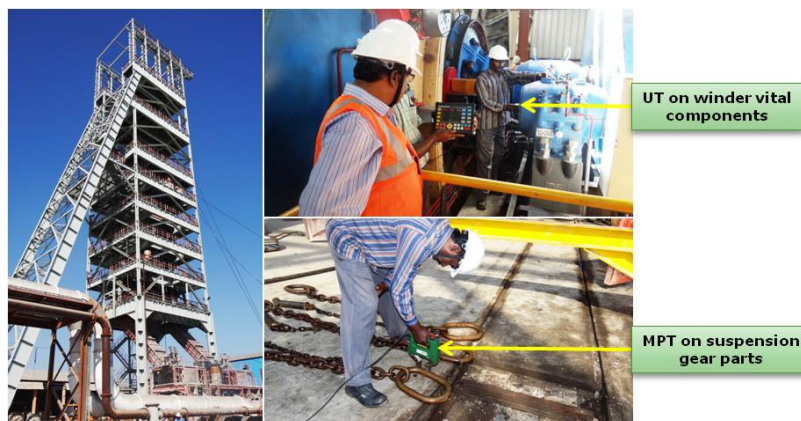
NDT on winder vital components, suspension gear parts at Main Shaft
